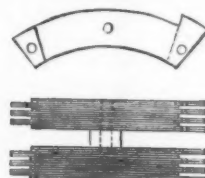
ELEVATION AND PLAN OF CORE SECTION.
